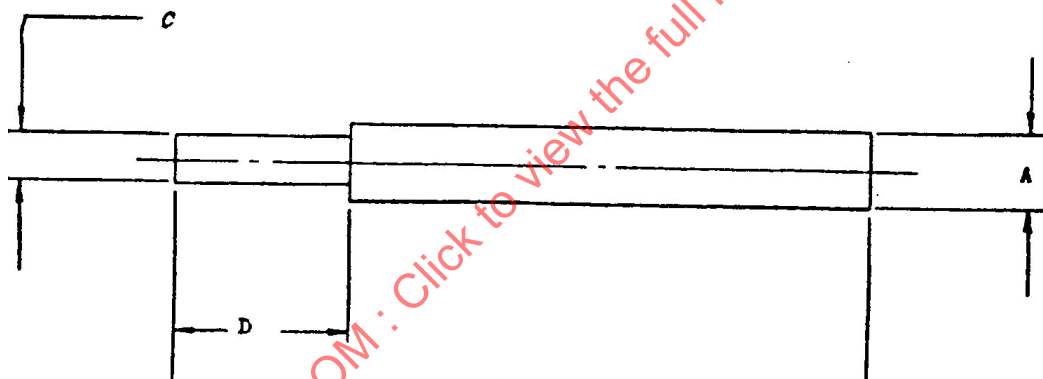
Type IV, Class 2, tang break-off tool for unified coarse and fine thread sizes 1/2 (0.500) and smaller
